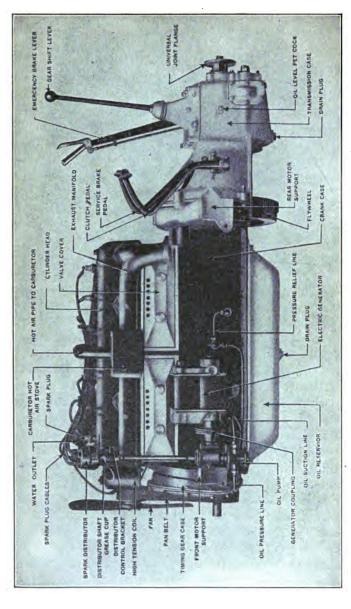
Side View of Chalmers Light Six Engine, Showing Arrangement of Power Plant Auxiliaries and Mounting of Gear Box as a Unit With the Engine.
